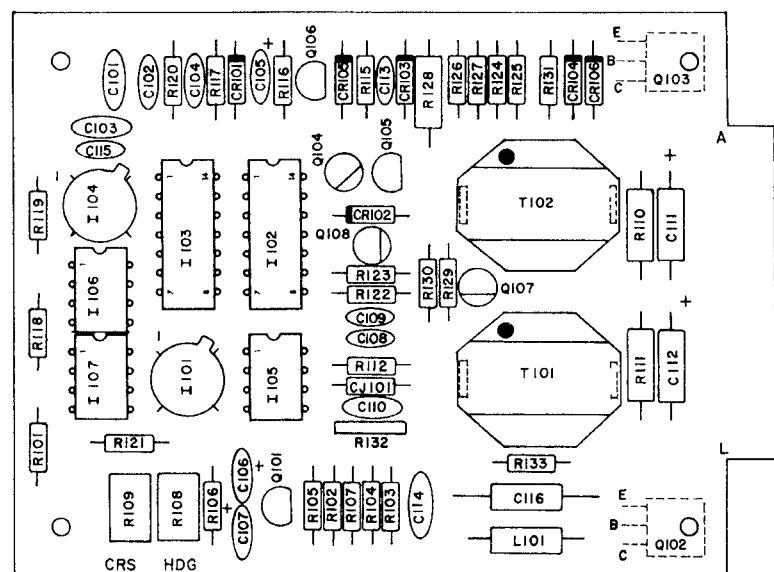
KA 57 PC BOARD ASSEMBLY DRAWING
